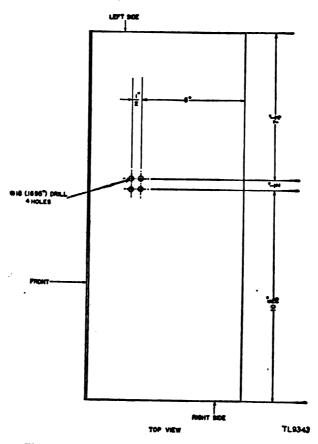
Drilling of Radio Receiver BC-312-() for Mounting FT-178.
